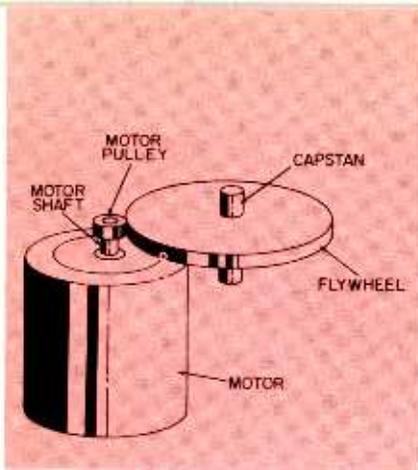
In the rim-drive system, a puck on the motor shaft drives the flywheel.
